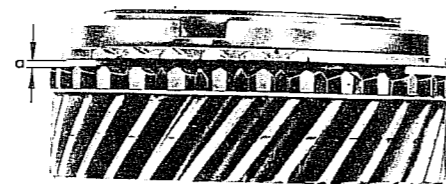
Synchroniser to gear wheel clearance.  $a = 0.6 \text{ mm. max.}$
